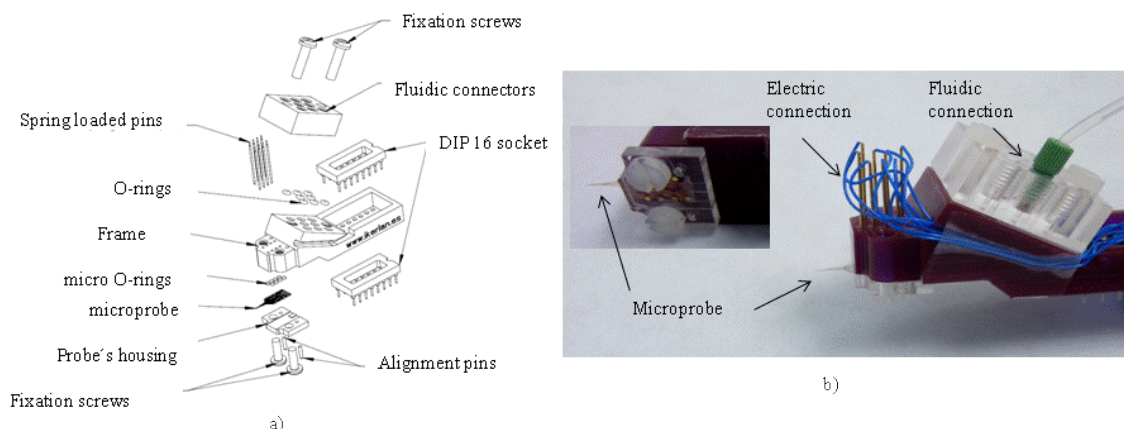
Microprobe packaging: a) Packaging drawing scheme and b) two pictures of an encapsulated probe
